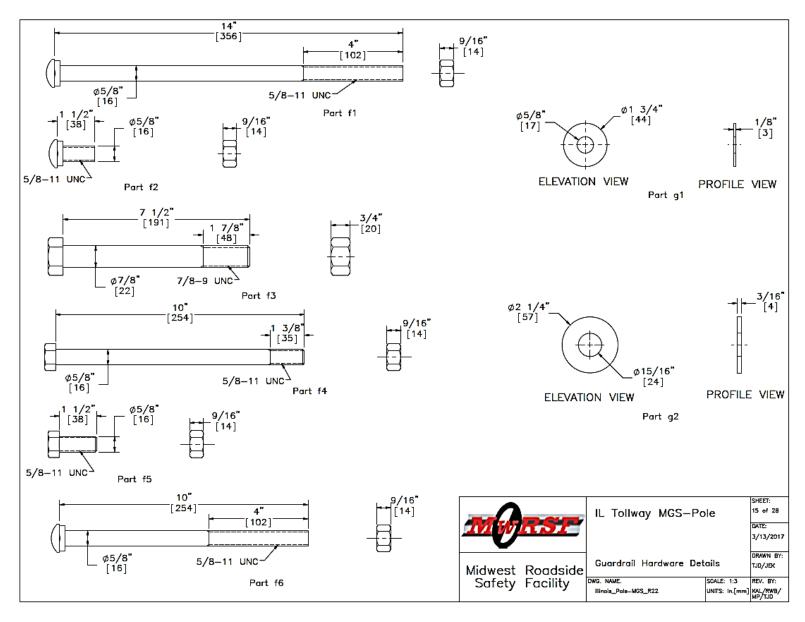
Guardrail Hardware Details, Test No. ILT-1
